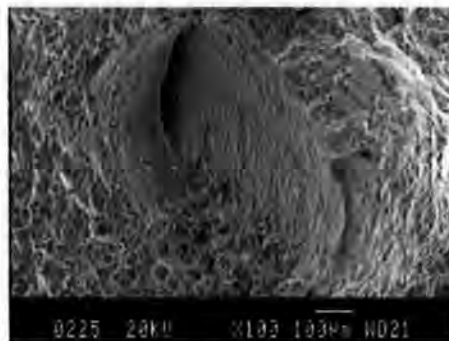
Elliptical void on the fracture surface of a FSW sample<sup>5</sup>.
